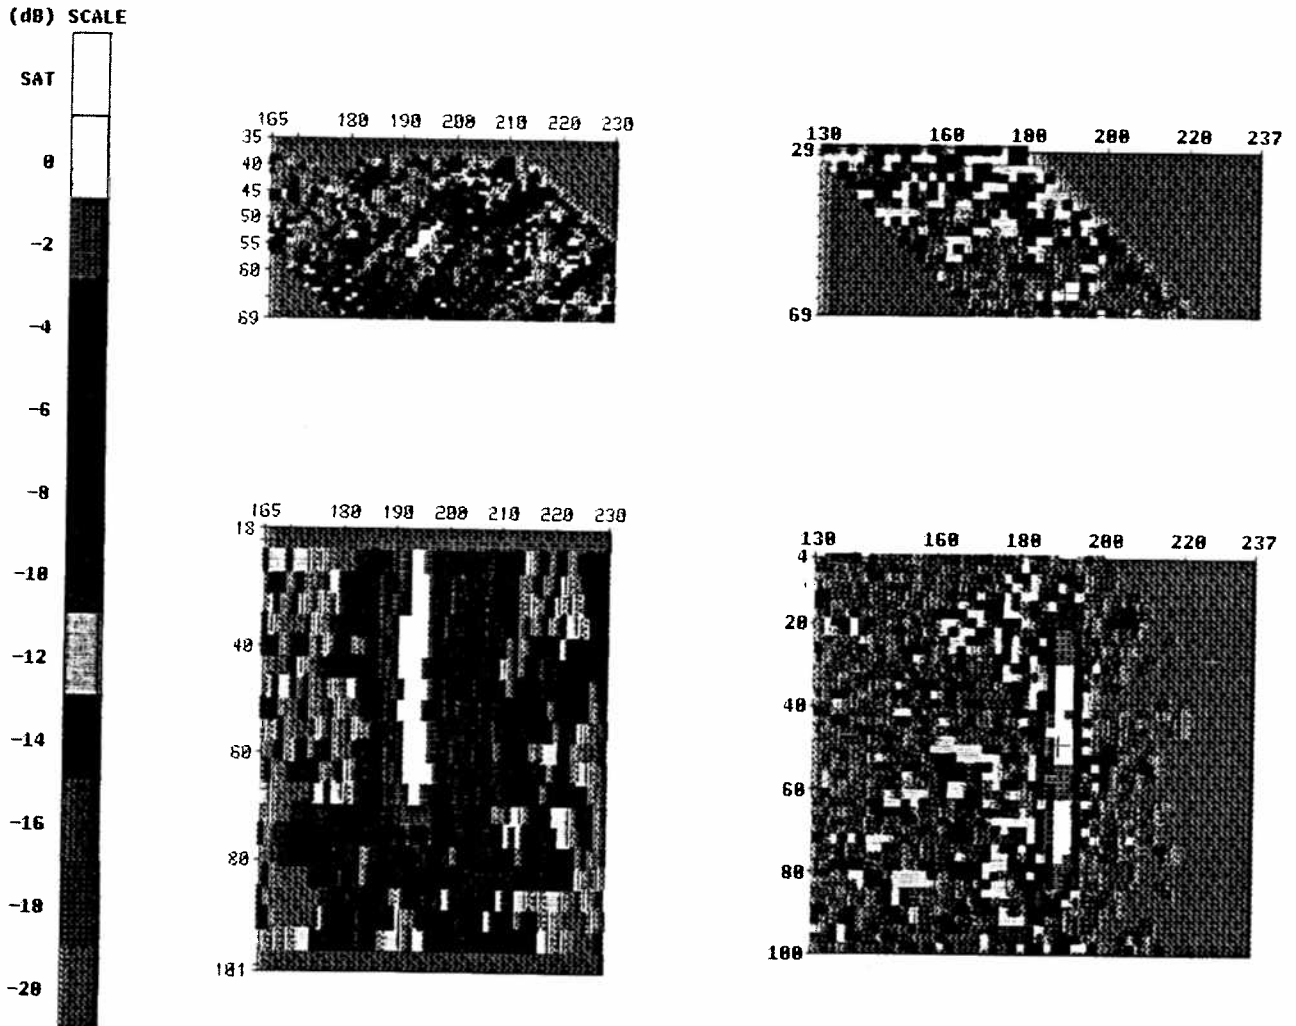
B-scan (up) and C-scan (down) views of 4 mm dia. hole side-drilled in SCSS. Left : TRL probe ; Right : focusing probe
